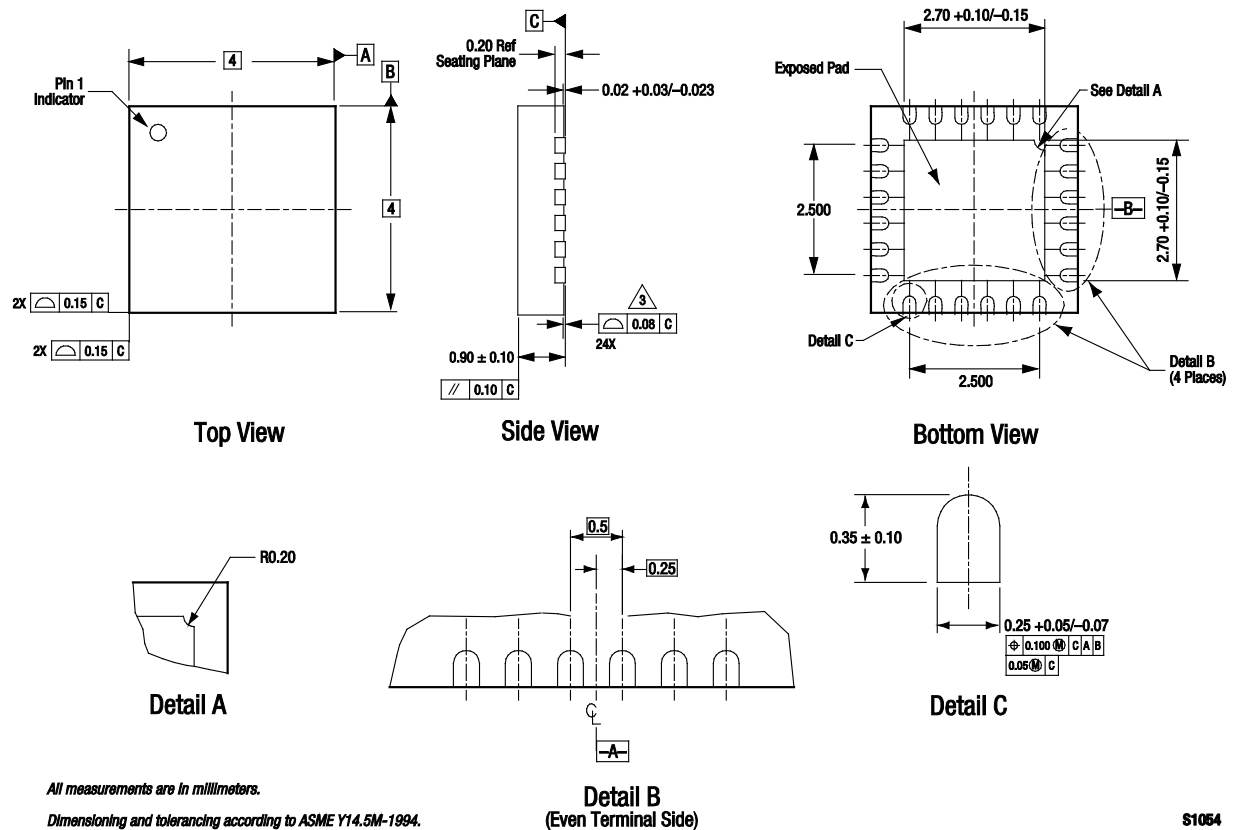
SKY12347-362LF 24-Pin QFN Package Dimensions
